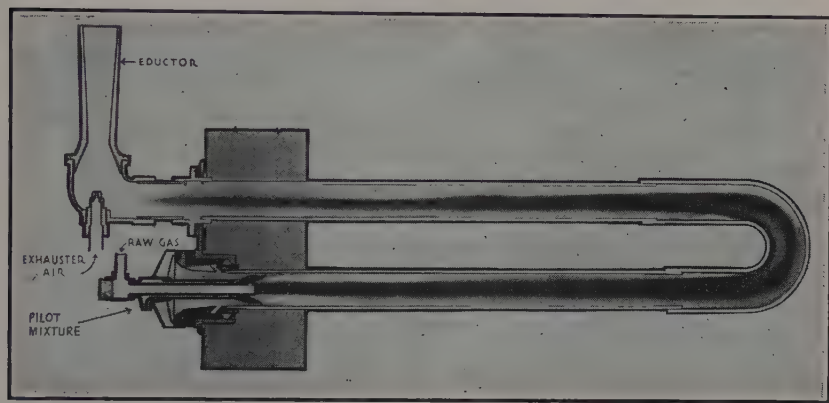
Radiant tube of the hairpin type. Courtesy of Surface Combustion Corp.
